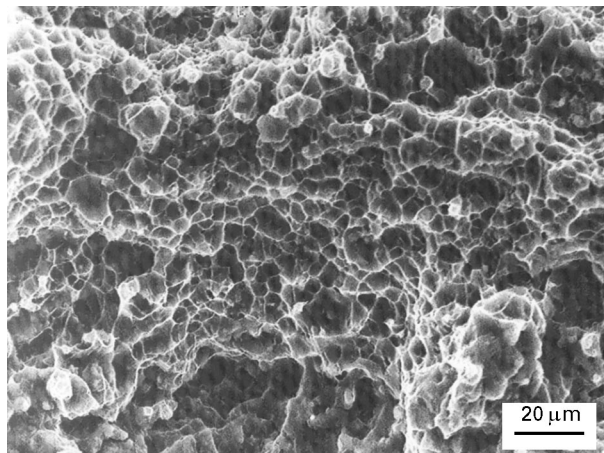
6061/SiC composite after 2000 cycles up to 220 °C: fracture surface of SENB specimen.
